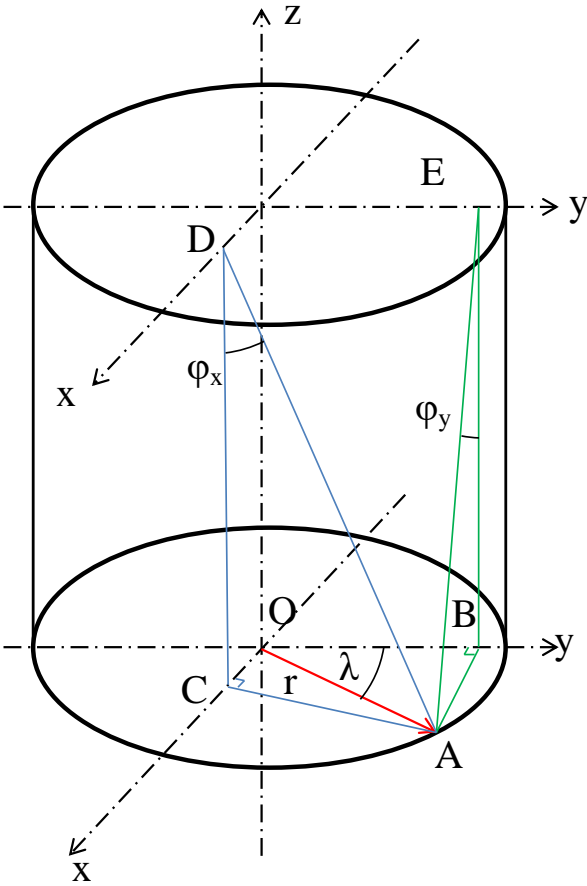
Cutting tool "barrel" with representative angles and calculation points.
